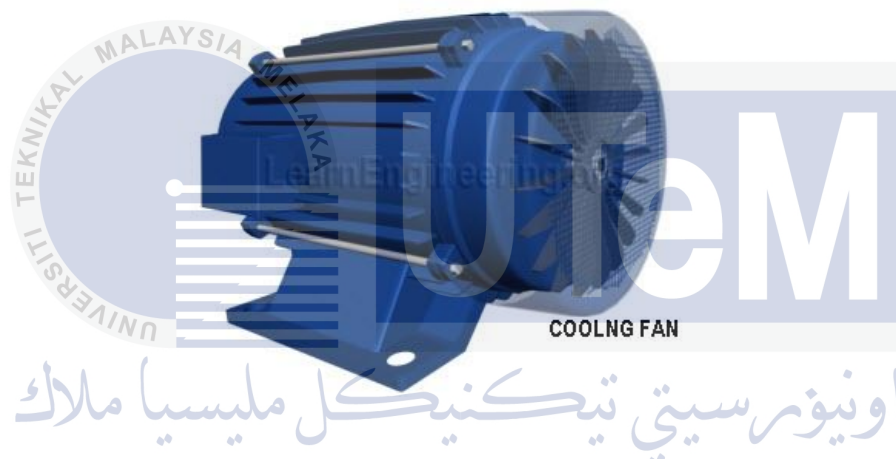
A cooling fan is used to remove heat at induction motor [2]
